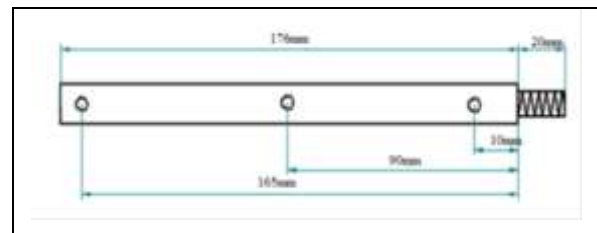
Pin Fin Specimen Dimension (ALHE30)
